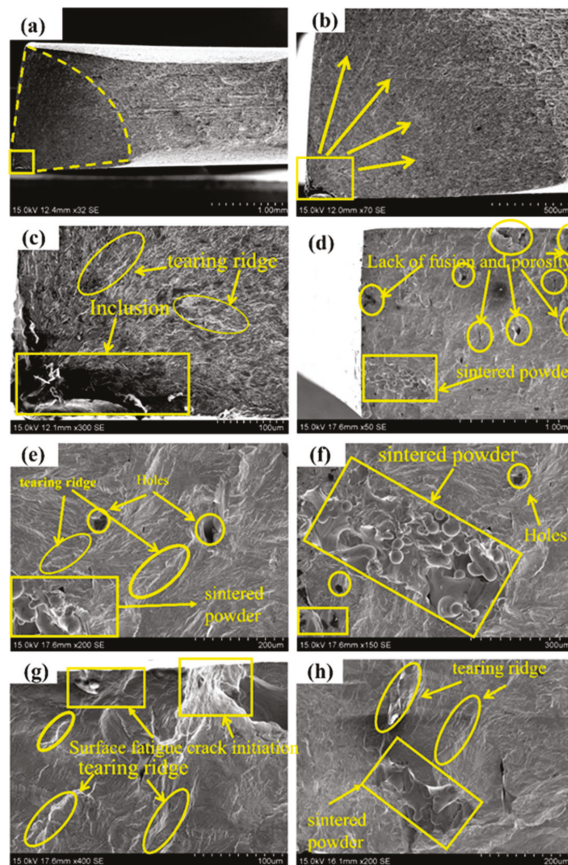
Fracture morphology of rolzSLM-316L fatigue initiation: (a–c) rolling 316L, (d–h) SLM-316L.
